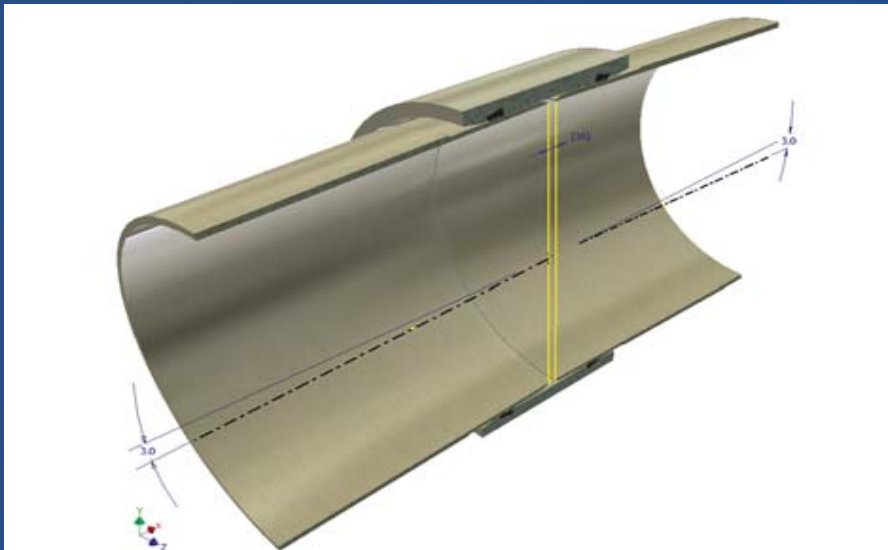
Double Bell and Spigot Joint with 3° Allowed Installation Angular Deflection
